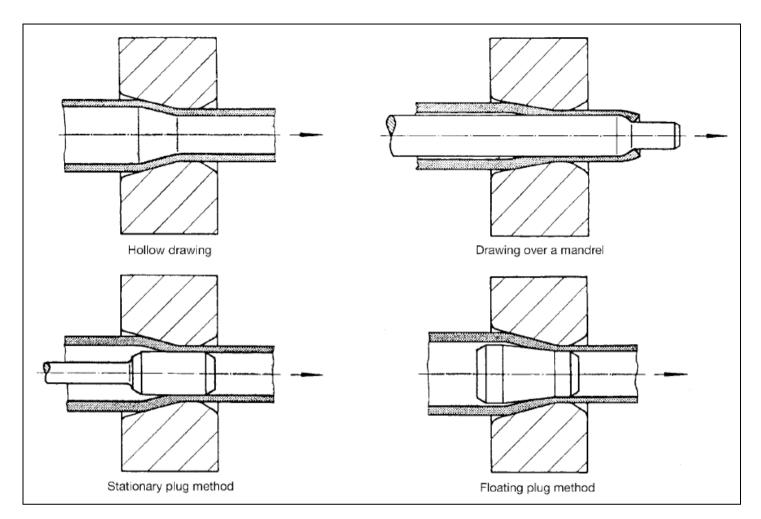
Diagrammatic illustration of the four main drawing processes for welded and seamless tube (from Brensig & Sommer, Steel Tube and Pipe Manufacturing Processes)
